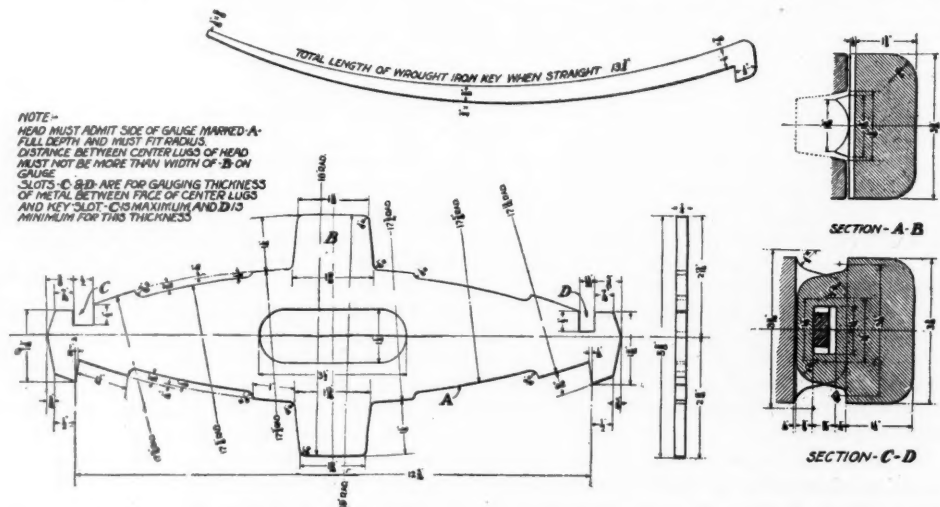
Recommended M. C. B. Standard Brake-Head Gage; Sections A-B and C-D to be Abolished
